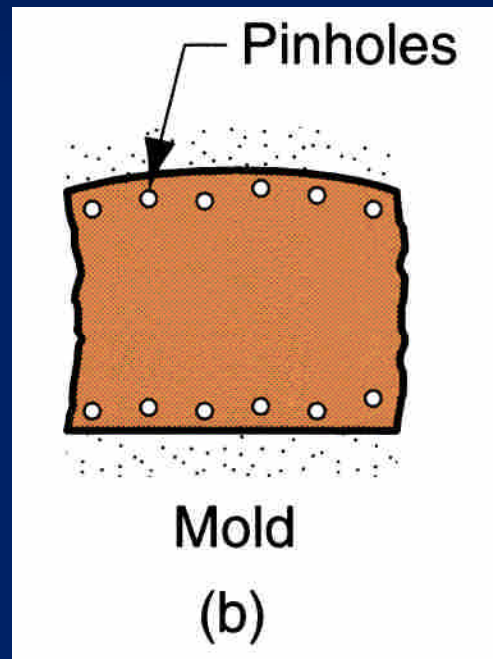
Common defects in sand castings: (b) pin holes
